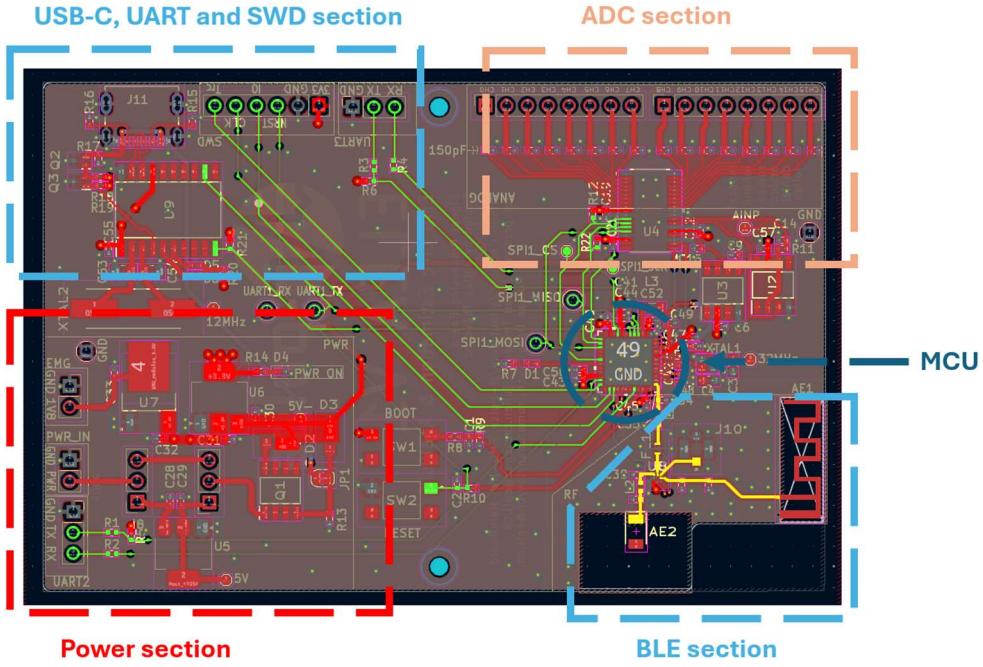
Important functional blocks of ELEA (KiCAD PCB layout)
